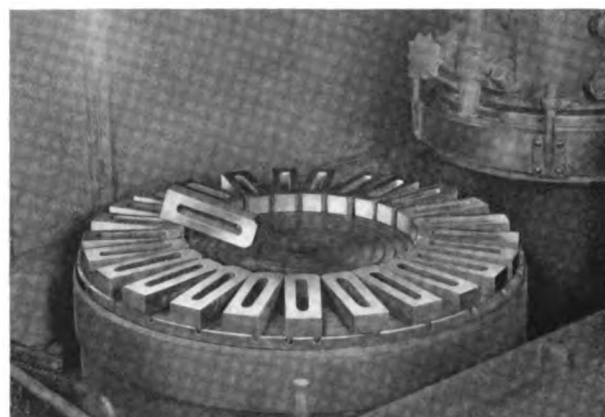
Steady Rest Jaws on No. 16 Grinder
